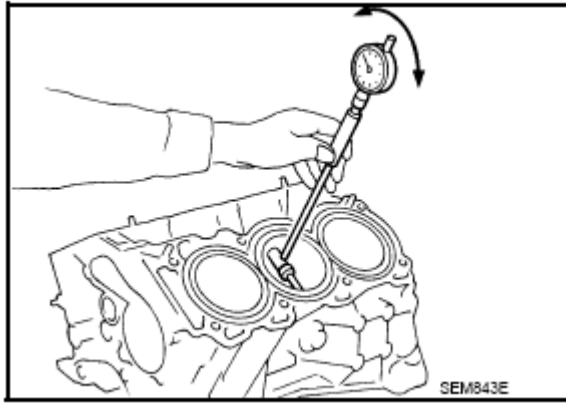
Measuring Cylinder Bore Using Dial Gauge
